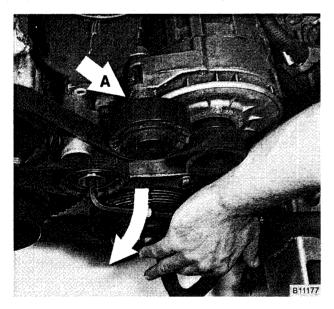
Pry off cover from tensioner and then lever tensioner clockwise to release belt tension. Remove upper roller (A) once belt is removed.
